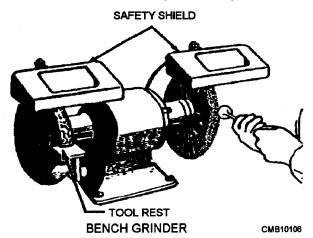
Cleaning a valve with a wire buffing wheel.
